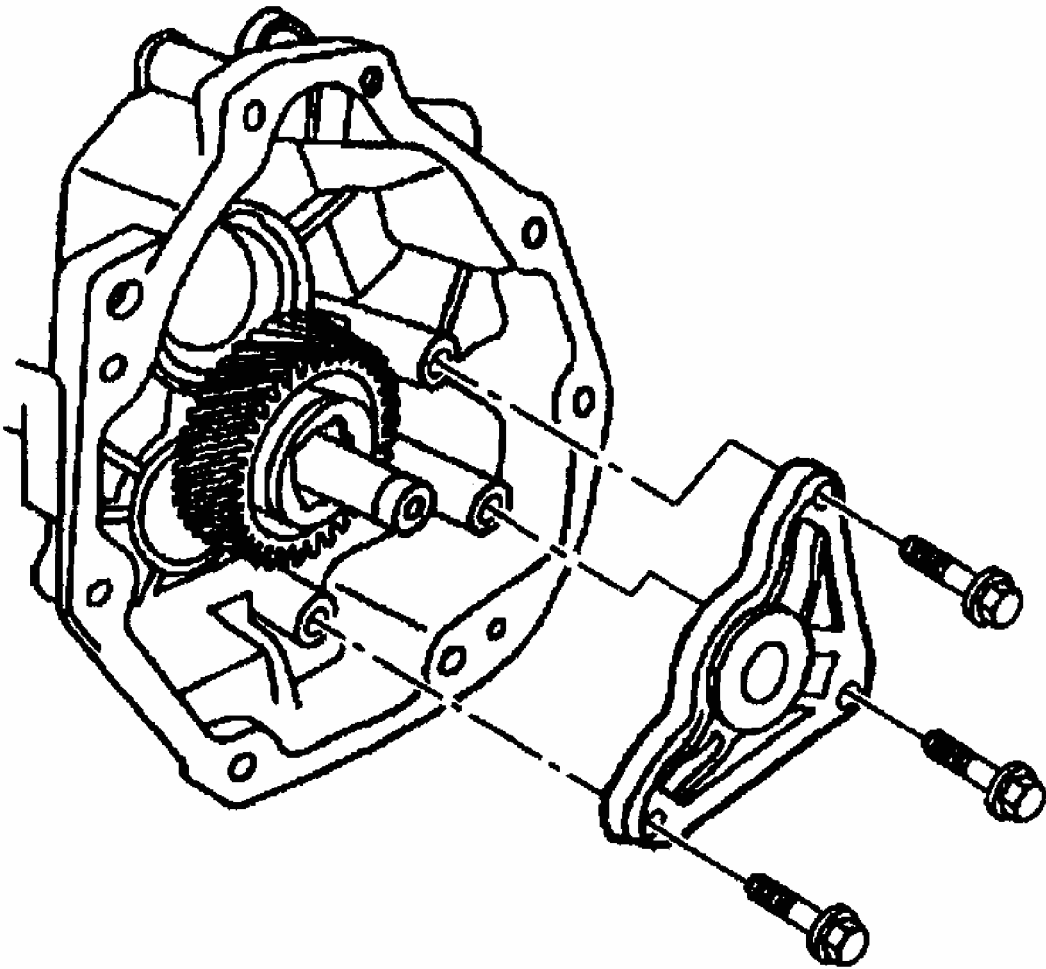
Applying Sealant To Reverse Idler Shaft Brackets Bolt Threads
